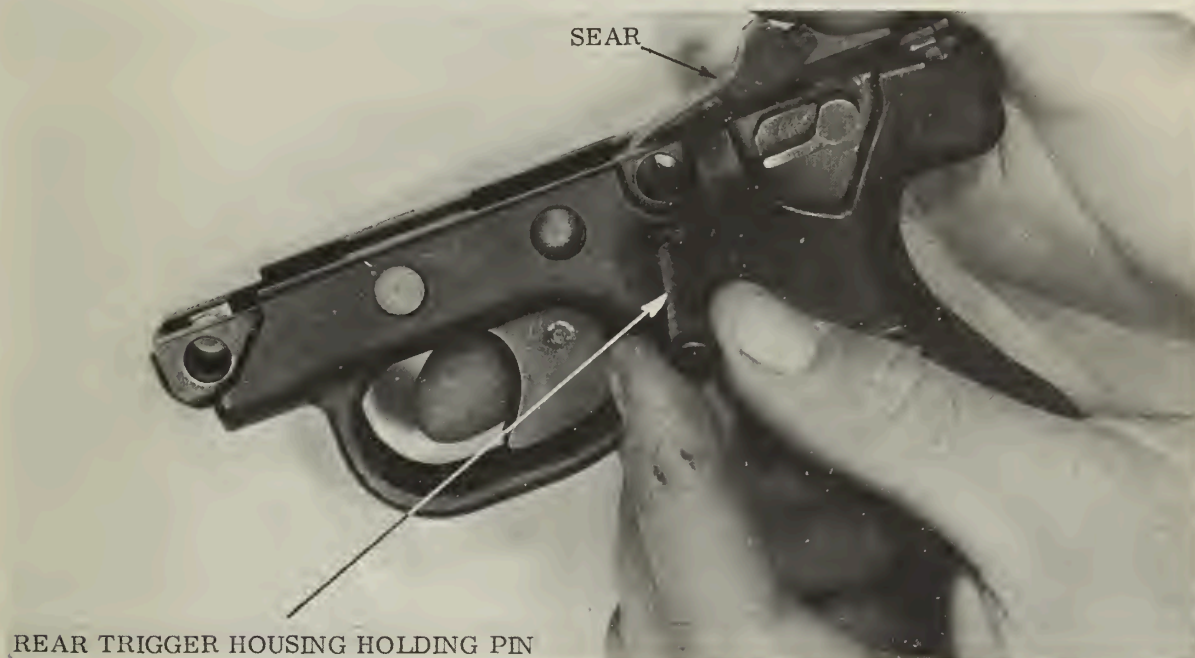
Removing the Rear Trigger Housing Holding Pin.
